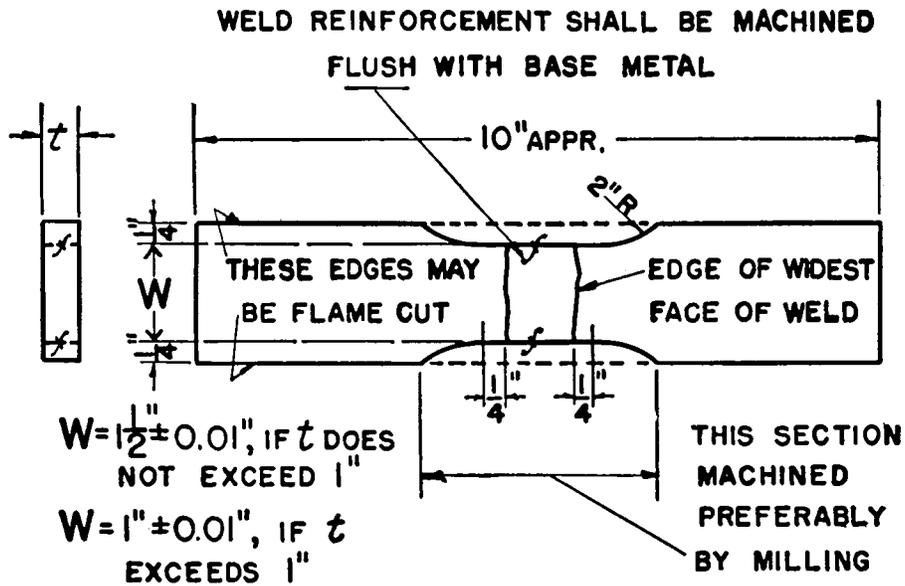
(F)(1)(I)—(PW-53.1) REDUCED-SECTION TEST SPECIMEN FOR TENSION TEST OF WELDED JOINT
